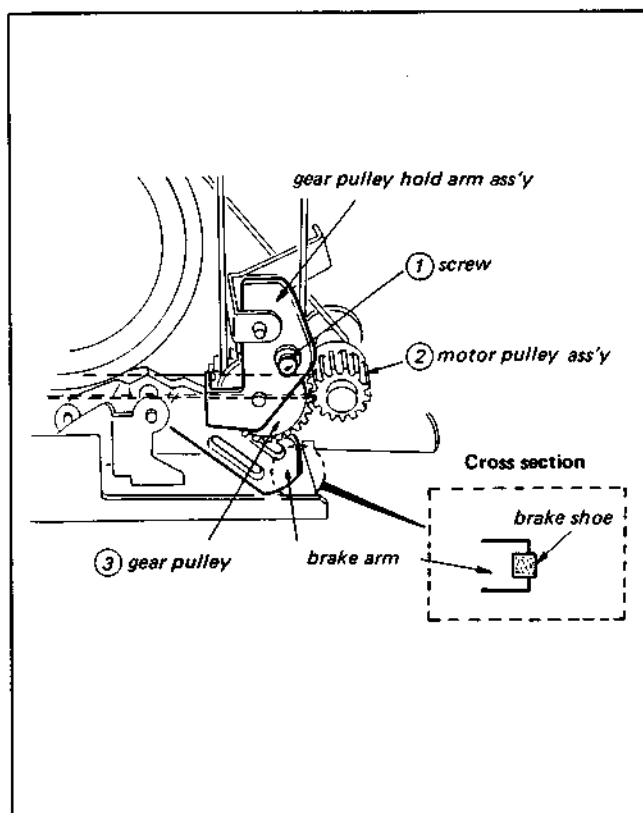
Position adjustment of gear pulley hold arm assembly
